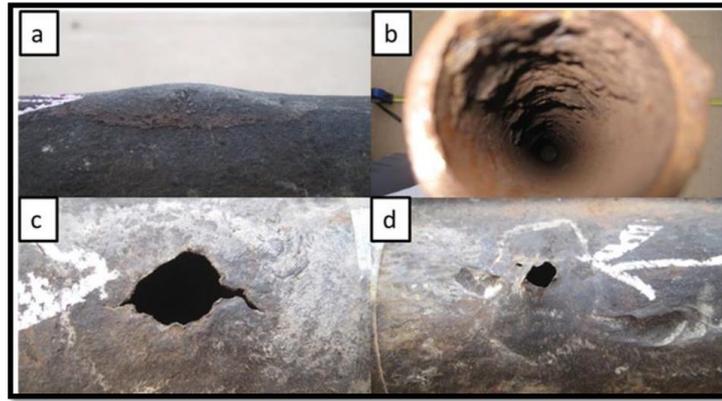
a) Bulging of tube # 22 b) internal heavy deposits of tube # 22 c) pin hole of tube # 26 d) pin holes of tube # 27.
